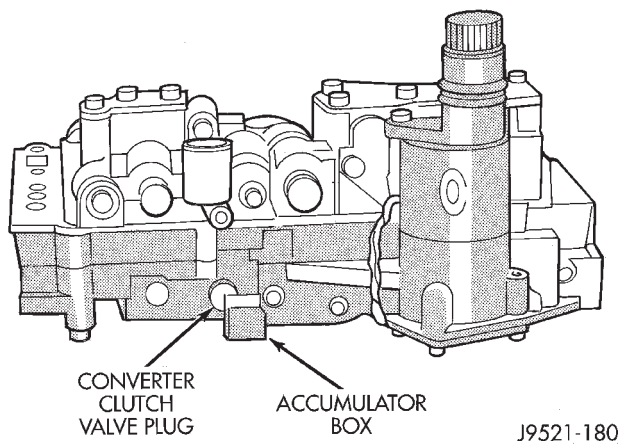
Seating 3-4 Accumulator On Lower Housing
